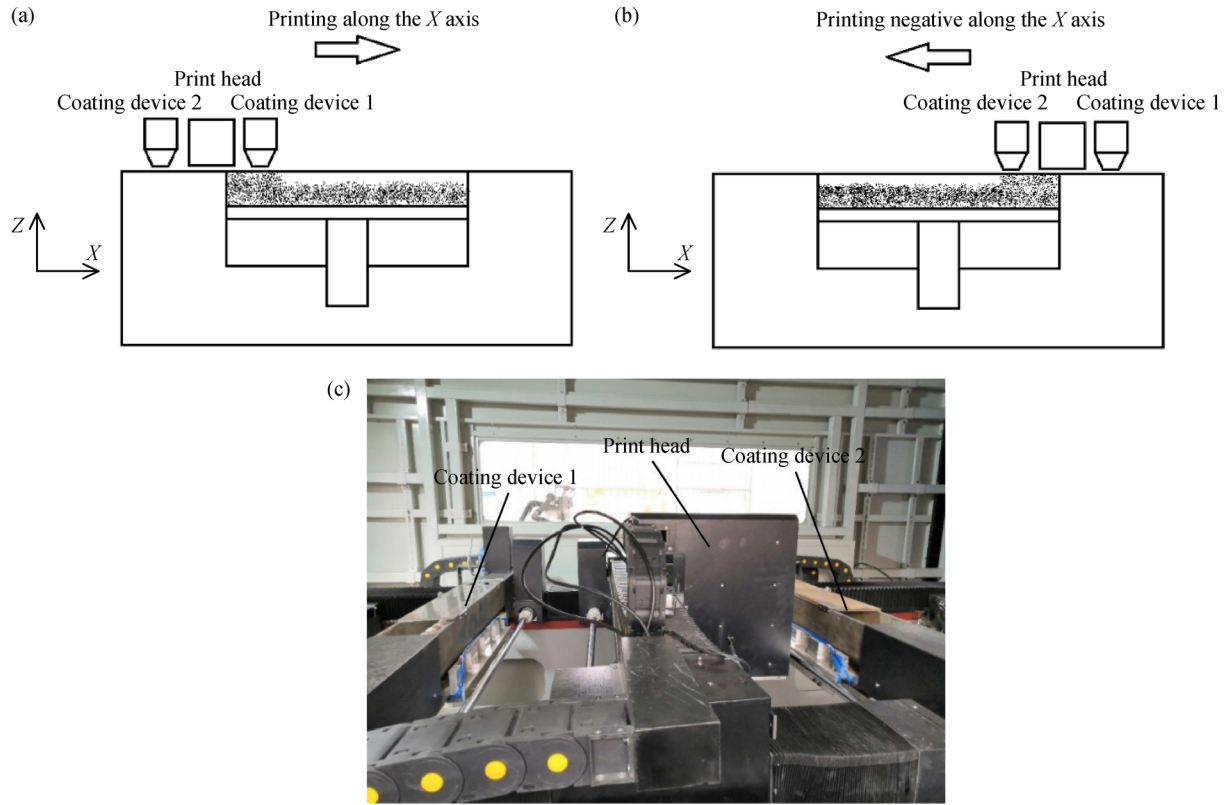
Two-way coating and printing integration forming method: (a) Forward printing process; (b) reverse printing process; and (c) photograph of two-way coating and printing integration device.
